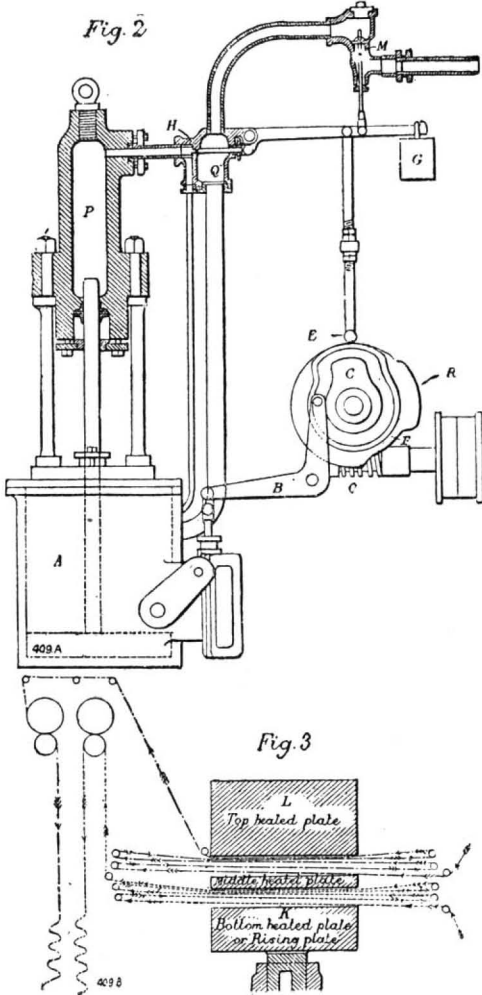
is a general view, Fig. 2 is a sectional elevation of the motive part of the machine, and Fig. 3 a section through the pressing part.
